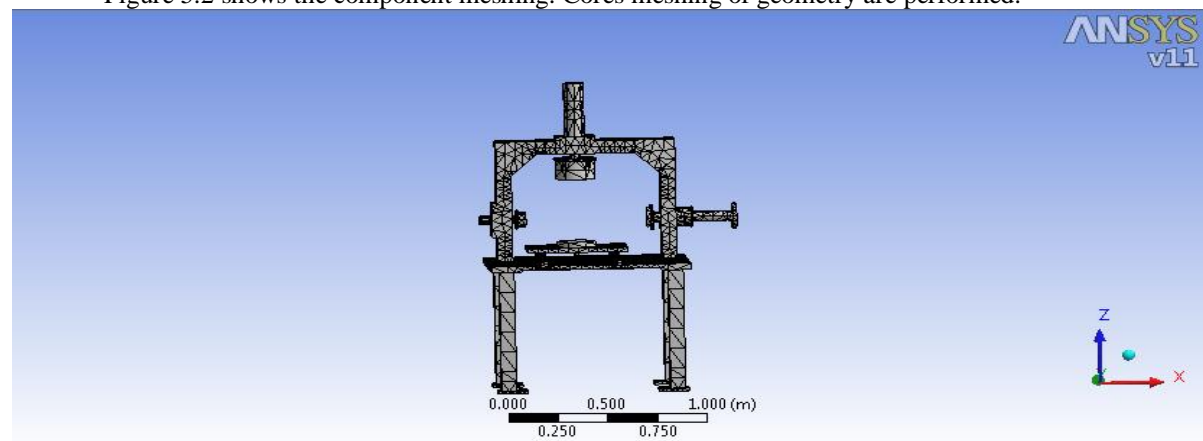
Coarse mesh of hydro-pneumatic press machine
